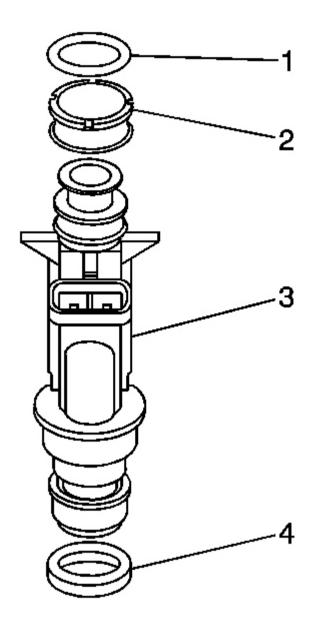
Exploded View of Fuel Injector Courtesy of GENERAL MOTORS CORP.
